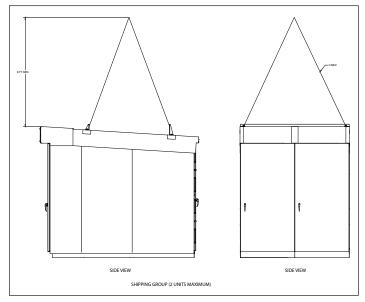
Lifting Angles for Outdoor Aisle-Less.
